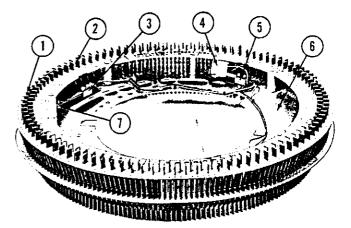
SELECTOR PLATES AND LATCH PIN ASSEMBLY 111129
